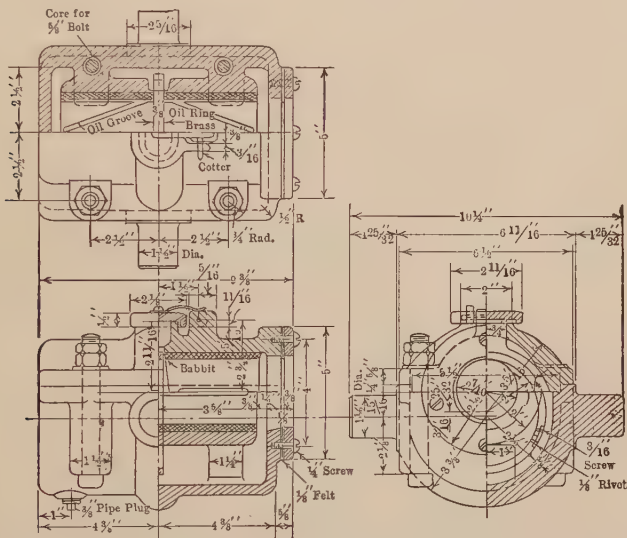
Self-oiling Trunnion Bearing for High-speed Grain Elevator Boot Shown in Fig. 273.
